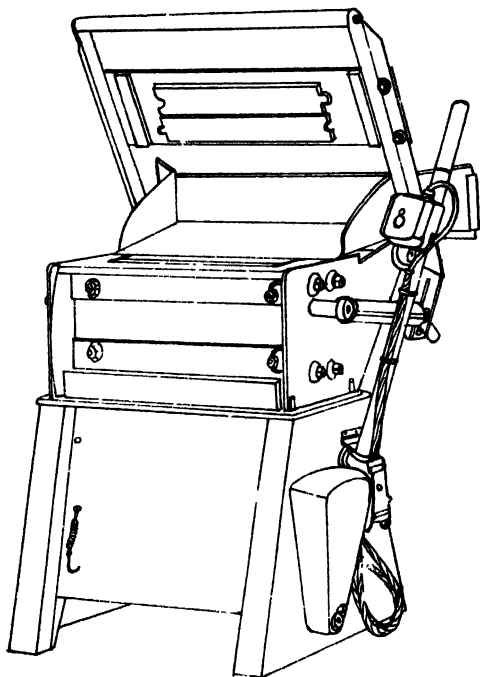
ELECTRICALLY VIBRATED BLOCK AND SLAB MACHINE
